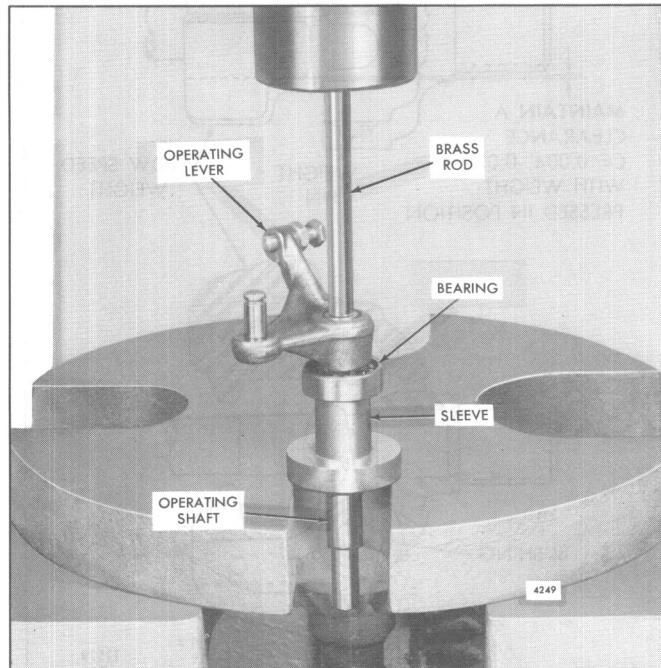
Removing Operating Lever and Upper Bearing From Operating Shaft
